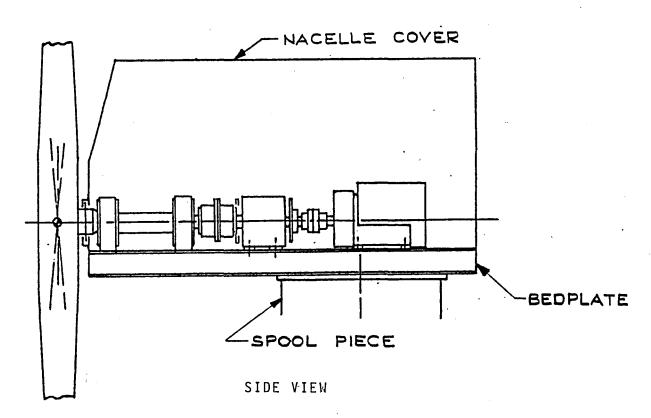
Concept 1: Teetered rotor supported by two pillow-block bearings with a parallel shaft gear box positioned with the high speed shaft offset to one side of the rotor center line
